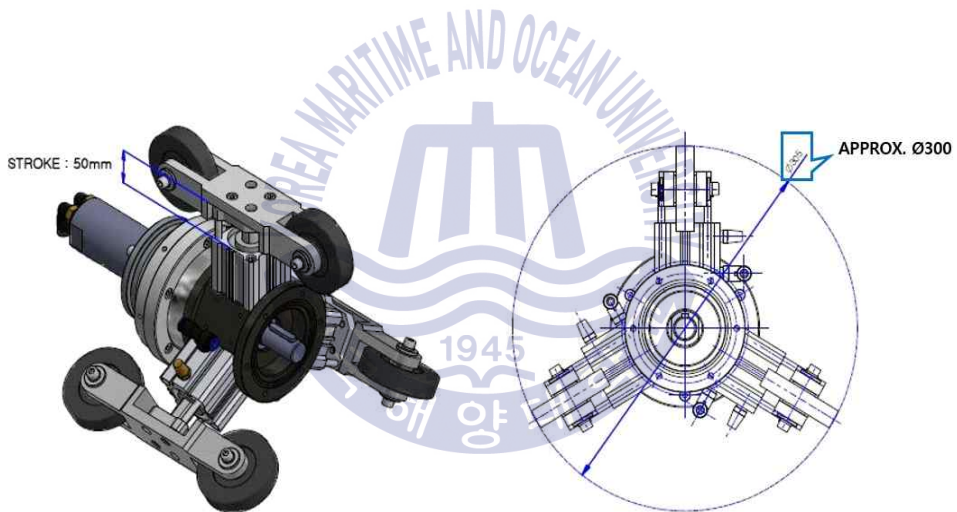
Stroke of air cylinder for the auxiliary wheel set
